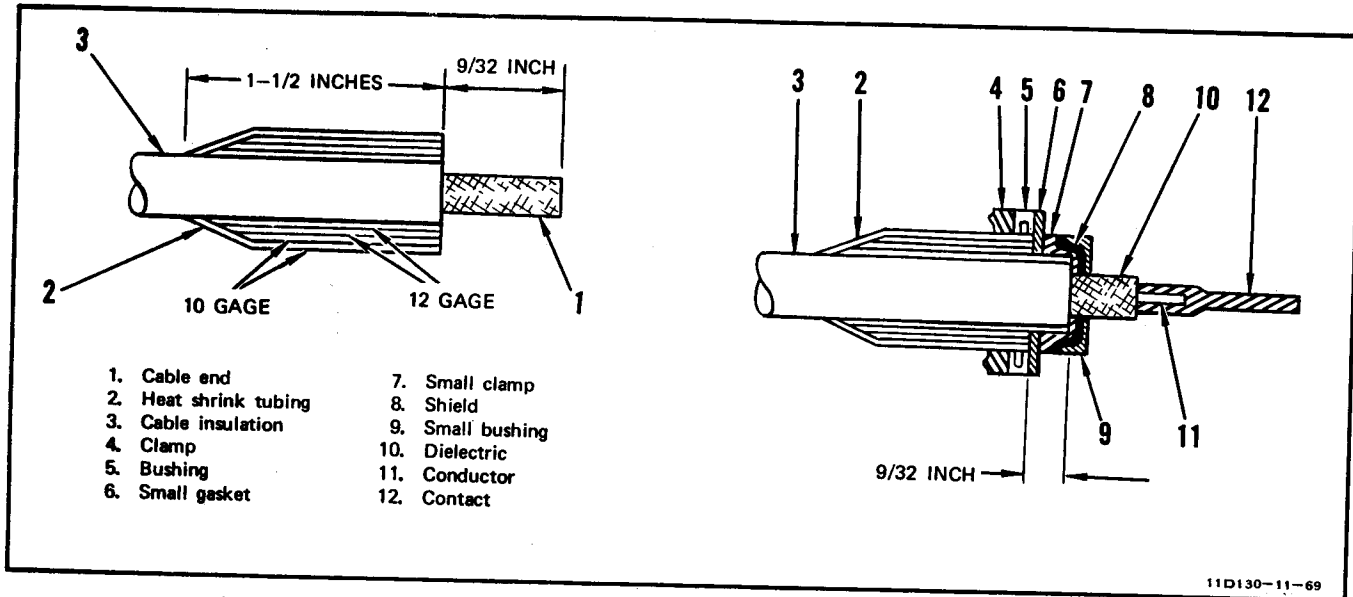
2675-1, 2742-1, and 3197-1 Triaxial Connectors - Contact Repair
